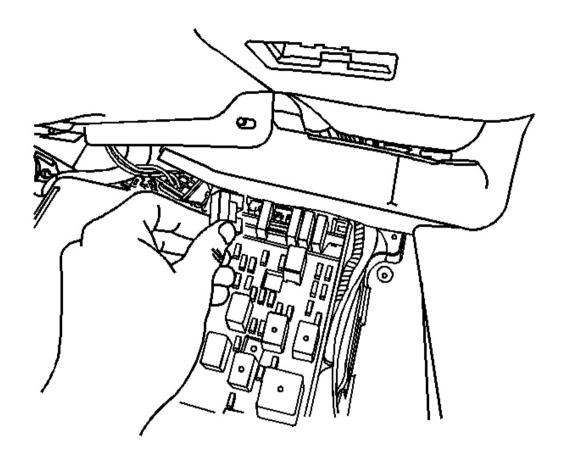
HDLP Maxi Circuit Breaker #54 To IP Electrical Center Courtesy of GENERAL MOTORS CORP.
